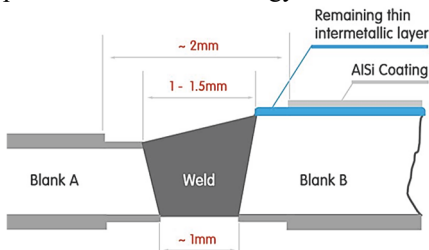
Schematic diagram of the principle of laser ablation weld plate technology [4]
